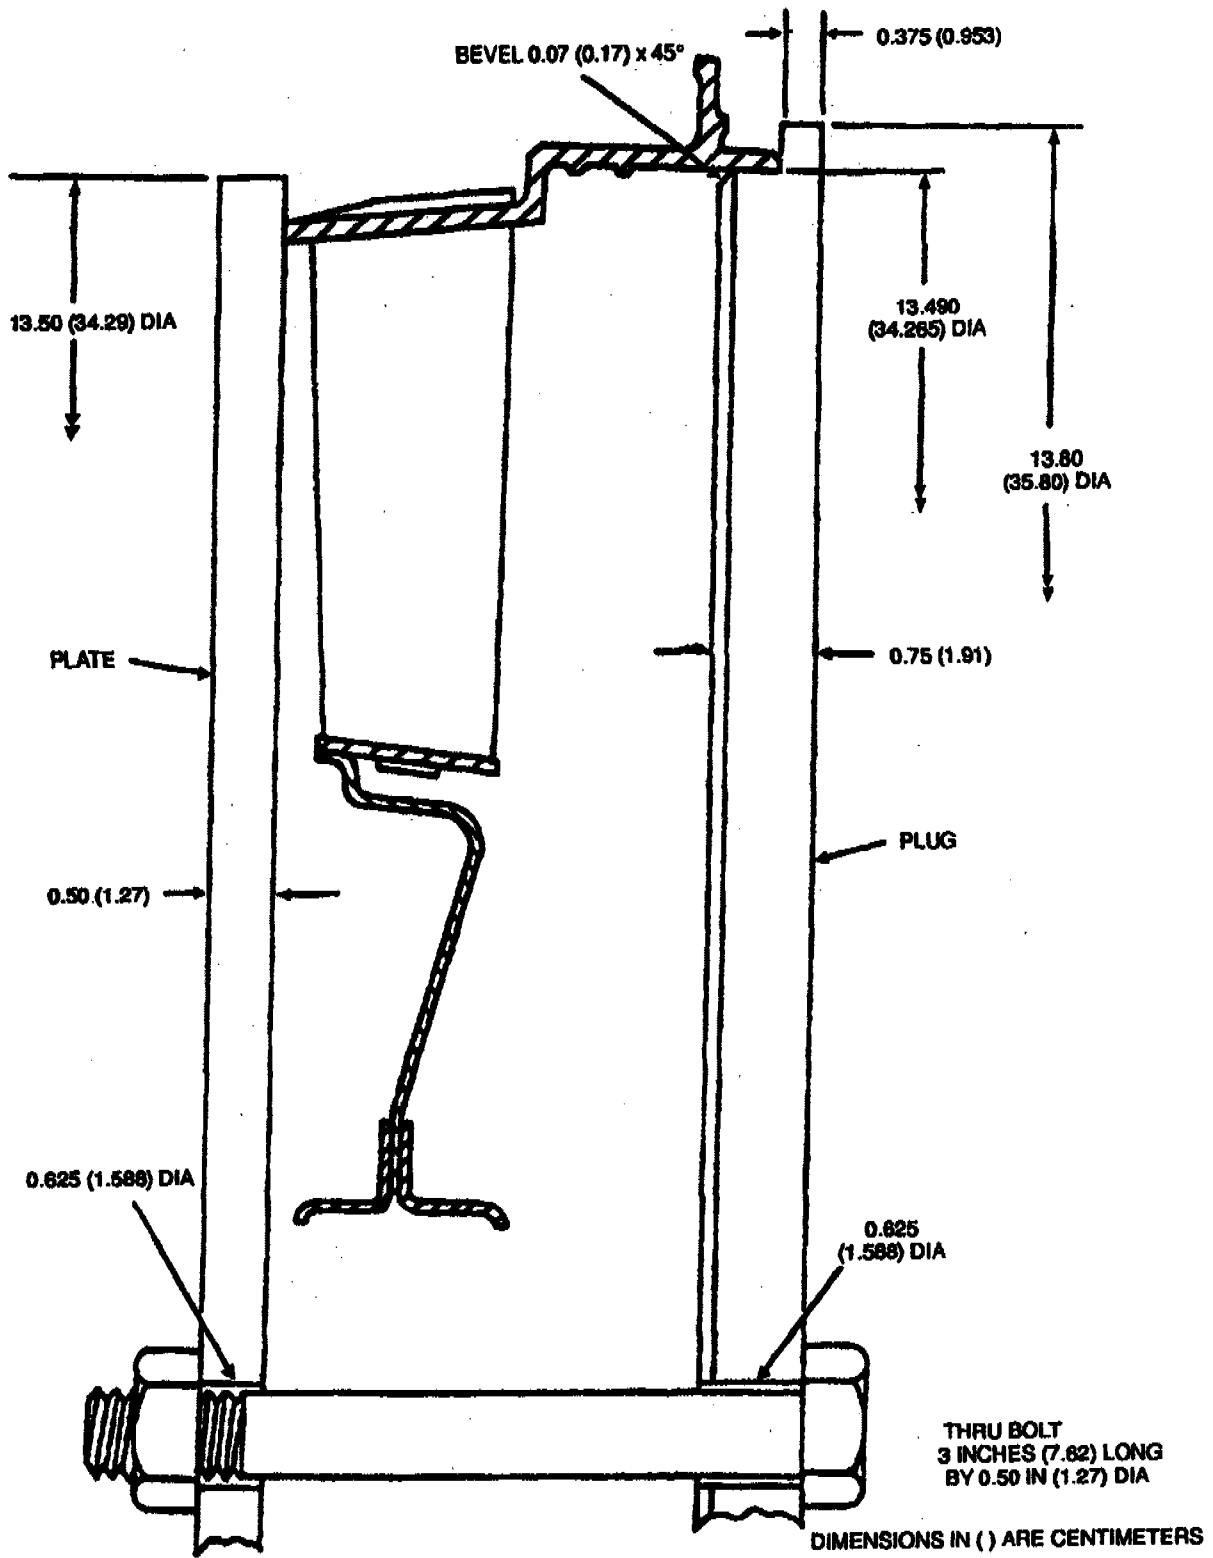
Straightening Outer Shroud - Second Stage Power Turbine Nozzle.
